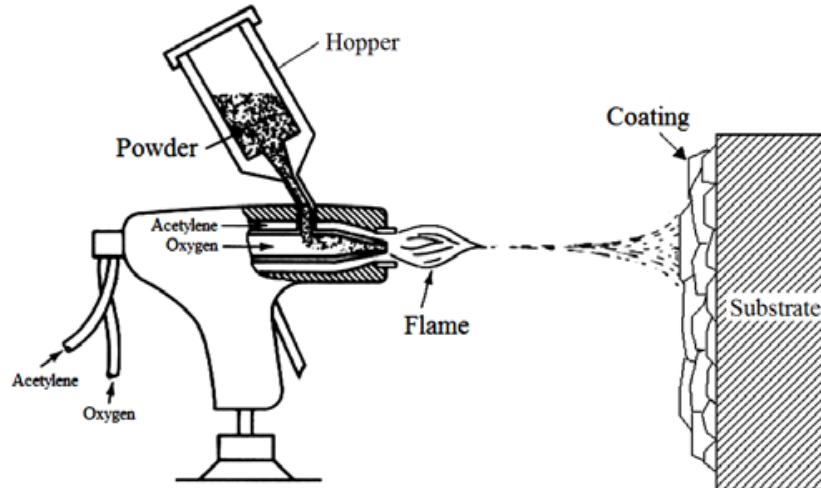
Flame Spray equipment showing the Hopper, Flame, and Coating [111]
